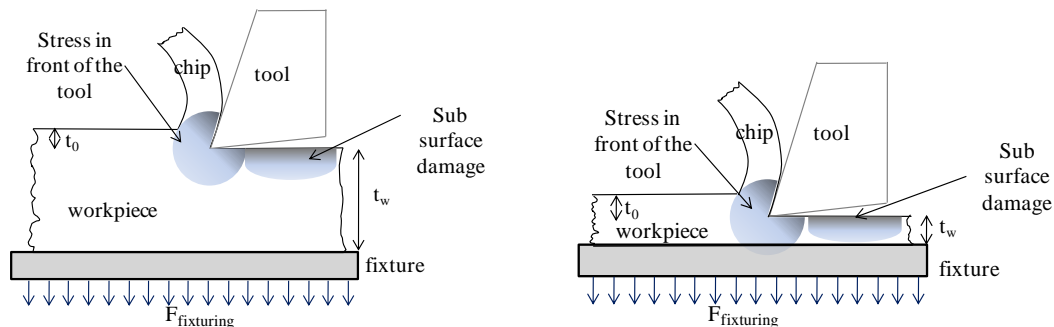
Illustration of the cutting process on thick workpiece (left) and thin workpiece (right). In a thin workpiece t_w is comparable to t_0 .
